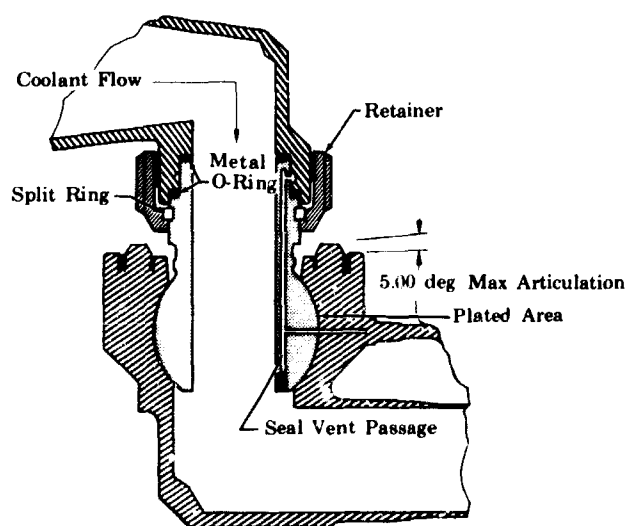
Single Transfer Tube Assembly Ball Joint Passages and Shaft Retention
